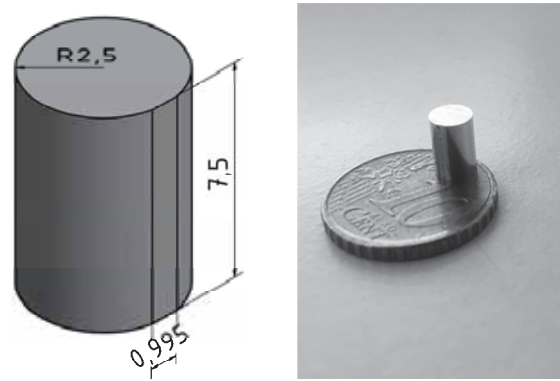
Dimensions (left) and photograph of a cylindrical aluminum sample (right)
